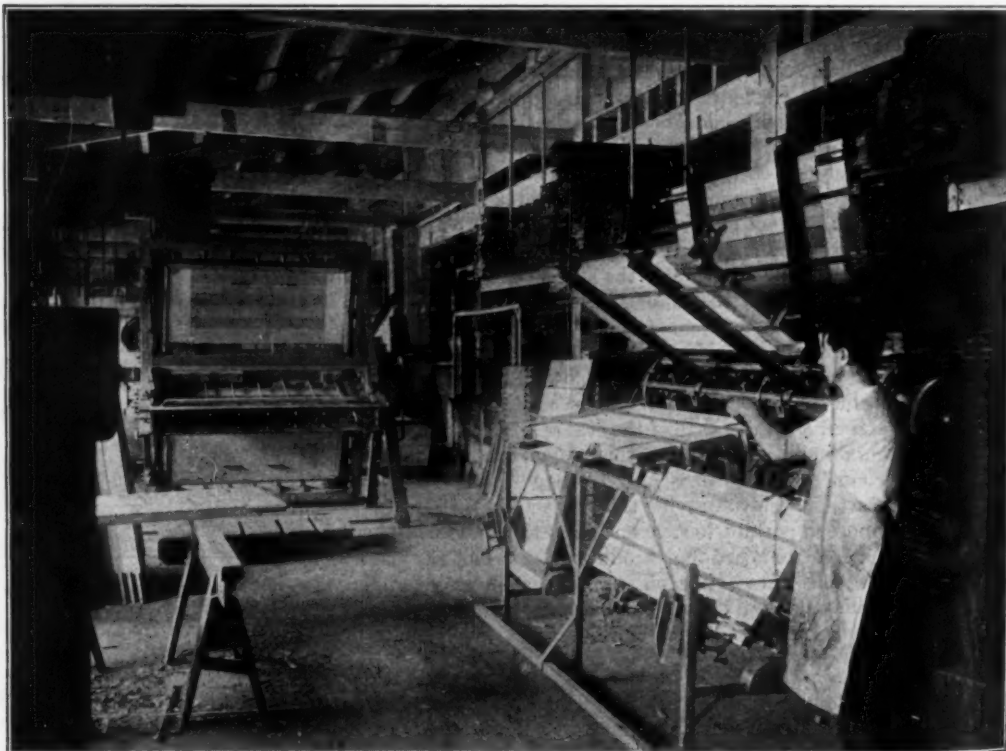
APPLICATION OF DOUBLE-DRAWBAR END CLAMPS TO CLAMP CARRIER GLUING KEY BOTTOMS
